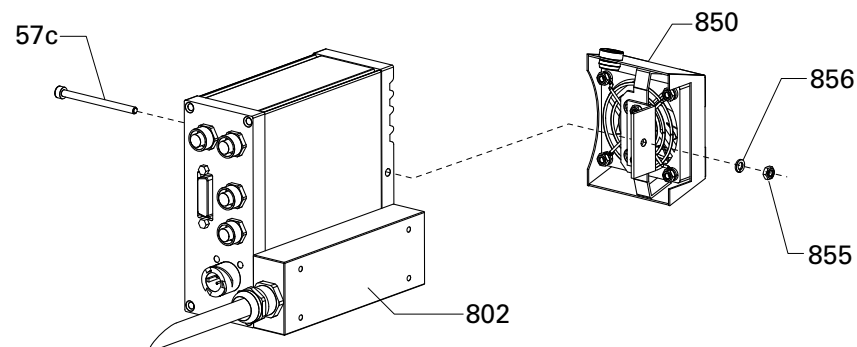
Mounting an air cooling unit to the electronic drive unit
